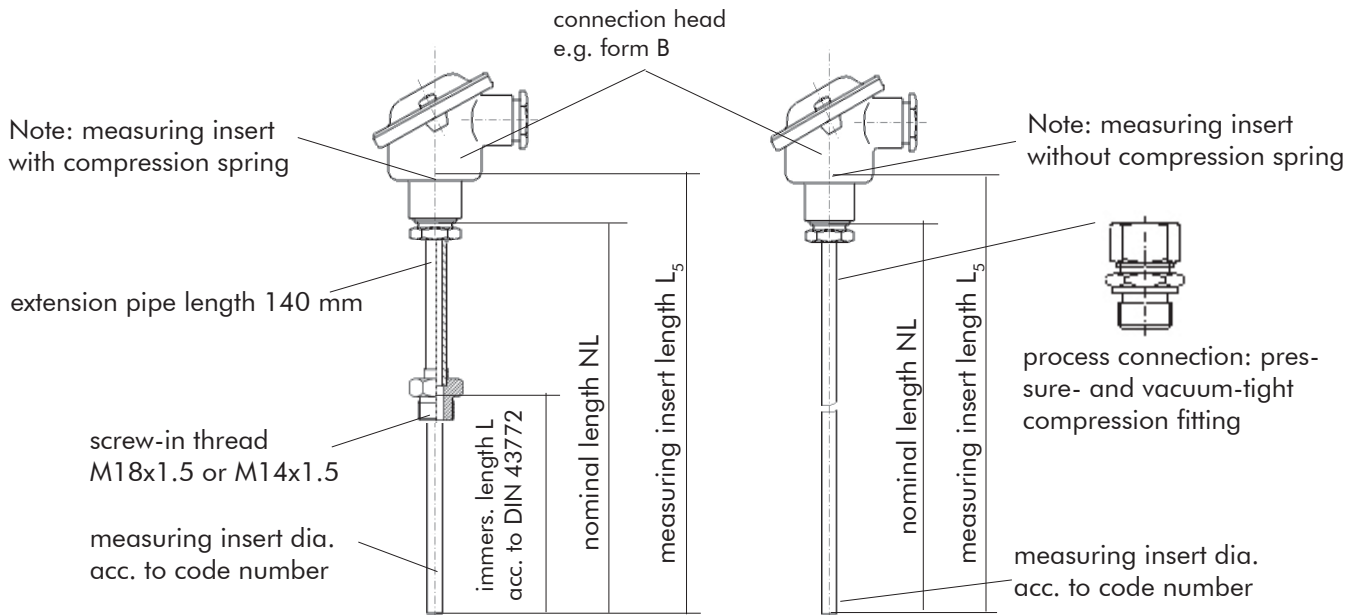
Thermocouple and resistance thermometer without additional protection tube
